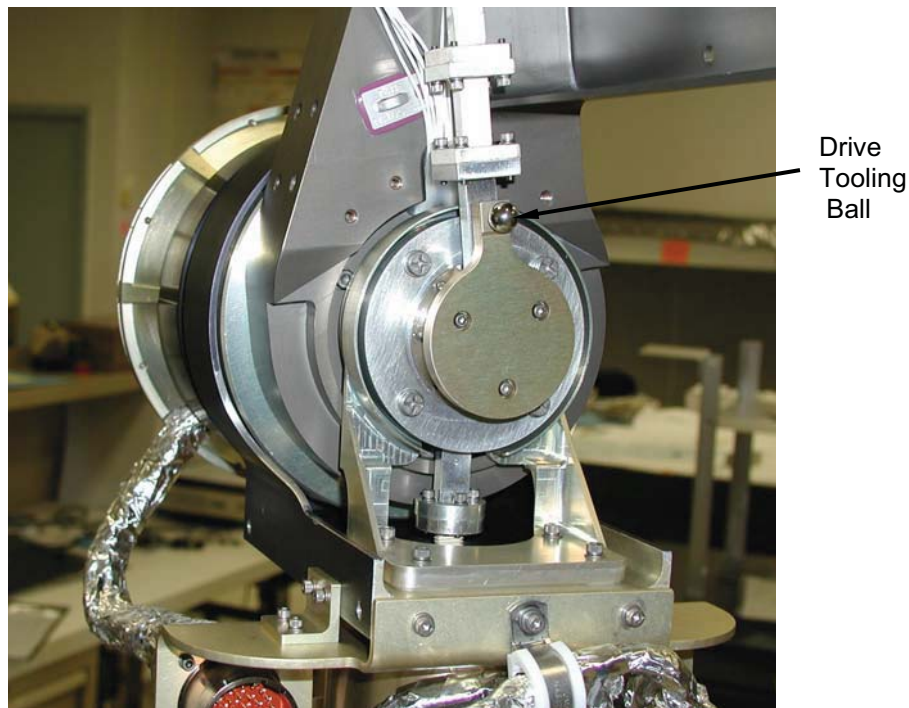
RF Rotary Joint with Drive Tooling Ball (Elevation Axis Shown)
